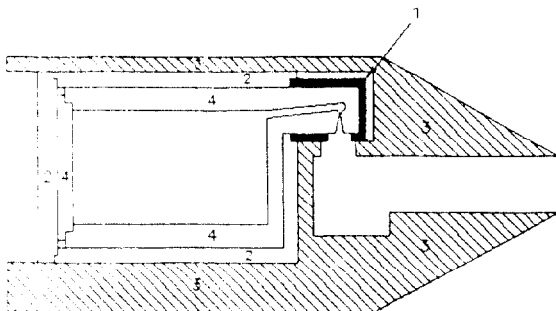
View of metal vapor stripper assembly: 1, fused quartz insulating sleeve; 2, ceramic insulating sleeve; 3, Aluminum housing; 4, Tantalum oven.
